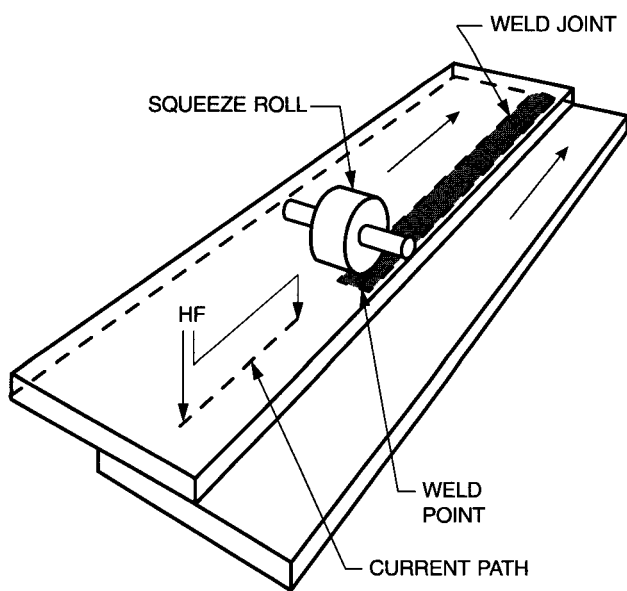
Lap Joint Made by High-Frequency Seam Welding
